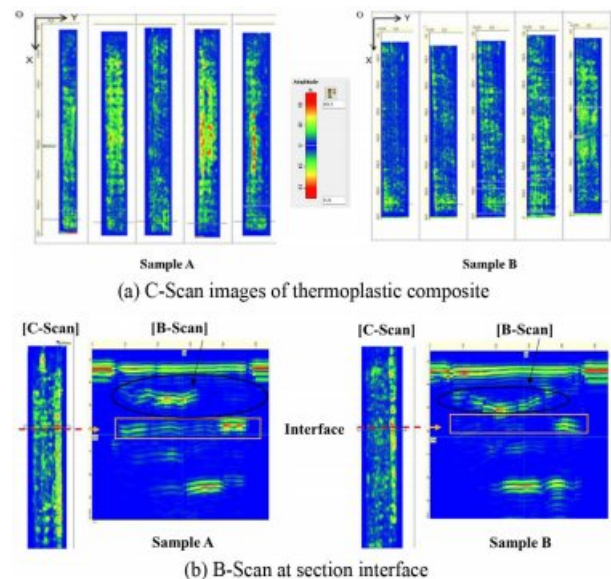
C- and B-scan images of thermoplastic composite after induction heating welding
